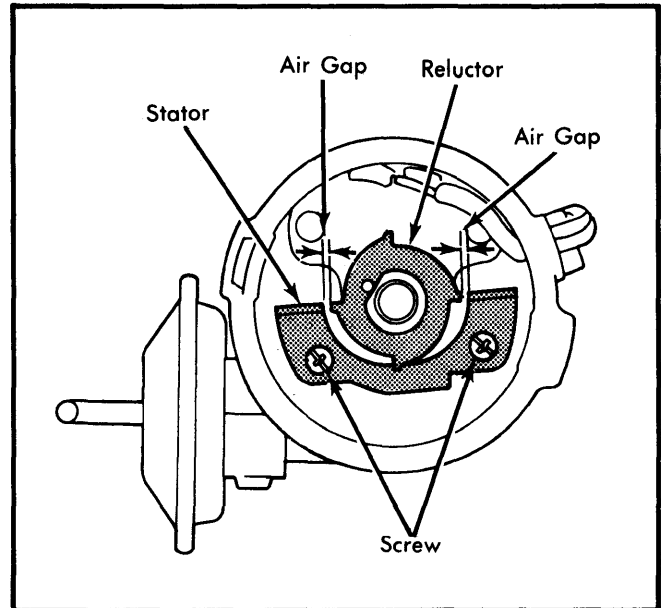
Adjusting Reluctor-To-Stator Air Gap
